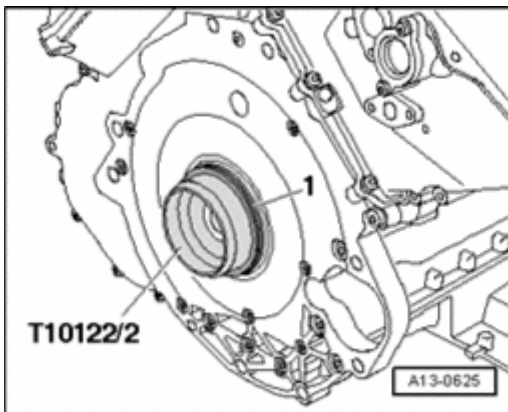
Pushing New Seal Onto Pull Sleeve T10122/2
